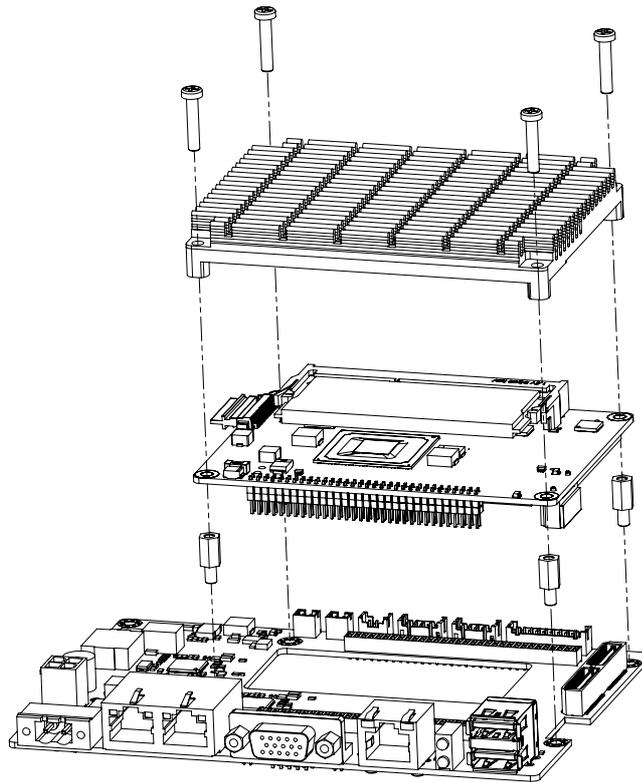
MIO-6300 Mechanical Drawing (Side View with Heatsink)
